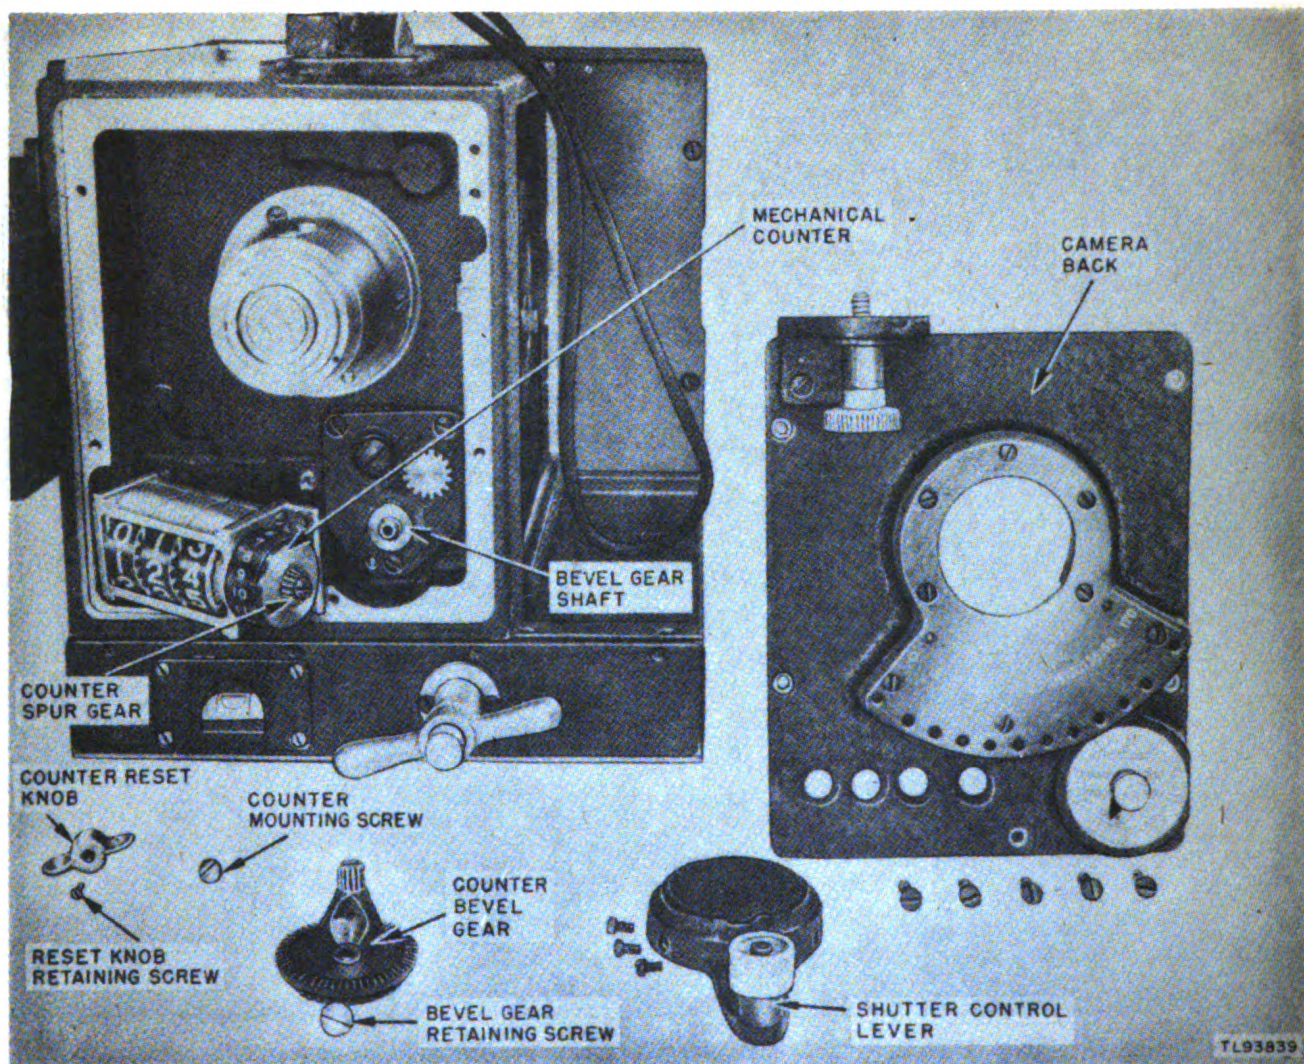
Rear view of camera box, showing mechanical counter partially removed.
